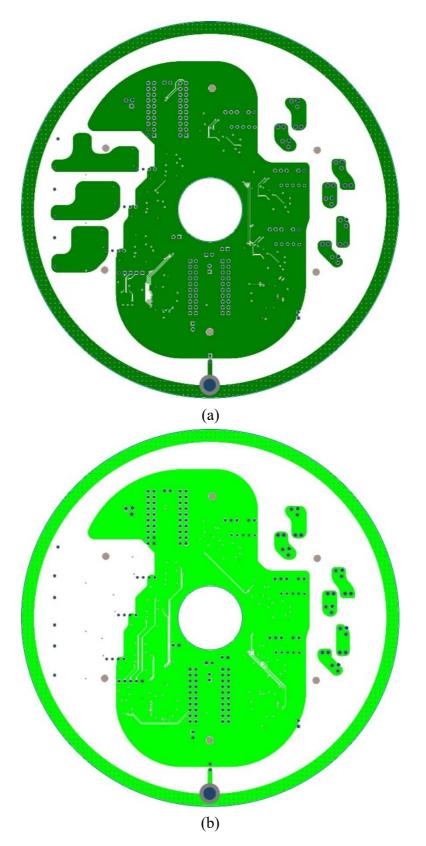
Signal Acquisition Board internal copper layers. (a) Top inner layer. (b) Bottom inner layer.
